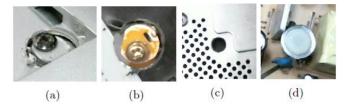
Examples of drilling/hole cutting in the disassembly of LCD screens.
